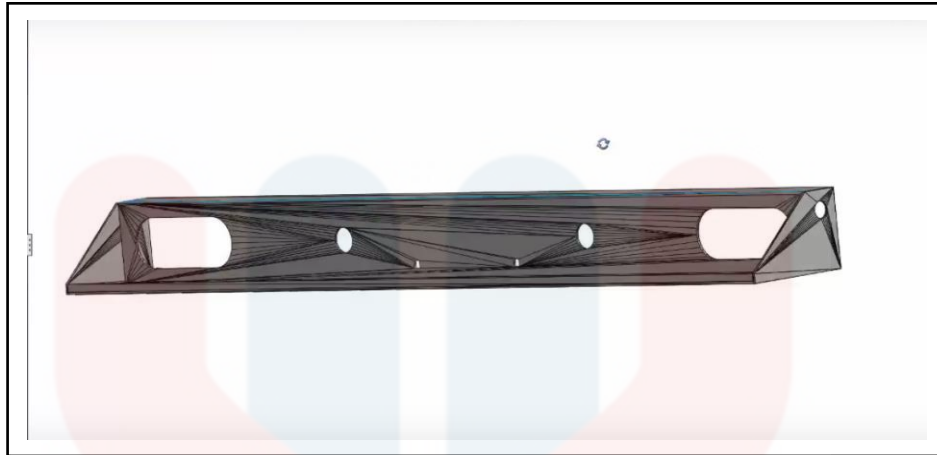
Used extrude cut to pierce a hole on the side of bumper beam
